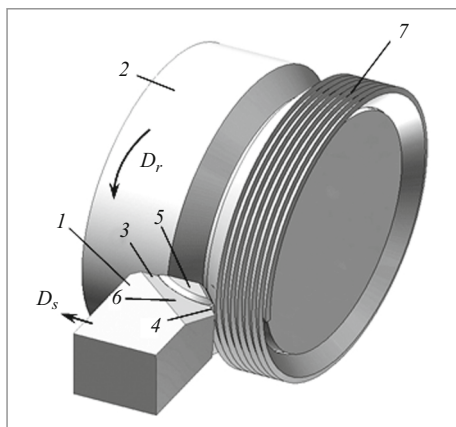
Diagram of DC [11]: 1) tool for DC; 2) workpiece; 3) cutting edge; 4) deforming edge; 5) undercut layer; 6) tool leading surface; 7) strengthened edge.
